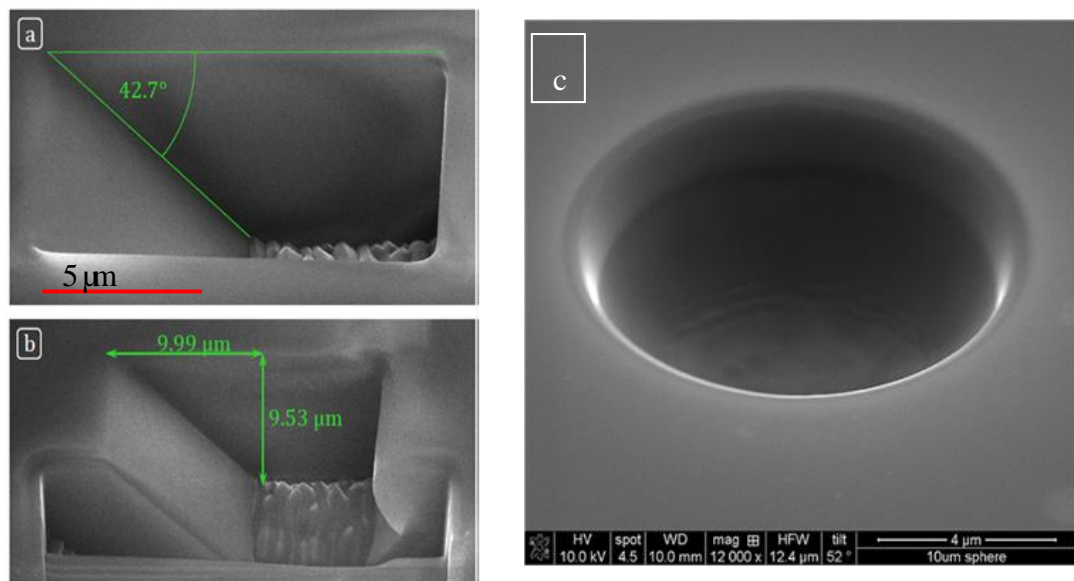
(a) SEM view of FIB machined structure, (b) SEM view of 45° mirror machined by FIB onto an optical fibre, (c) SEM view of micro hole machined by FIB (from [2.33]).
